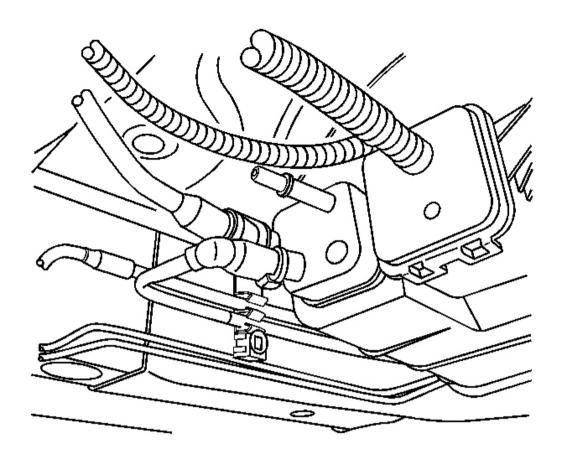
View Of EVAP Vent & Fresh Air Hoses Courtesy of GENERAL MOTORS CORP.
